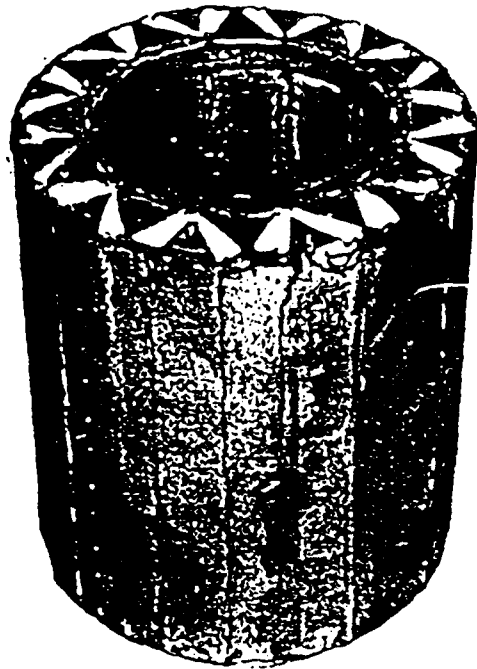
EXPLOSIVE CYLINDER CASTING (MODIFIED 12 SIDED CYLINDER)
